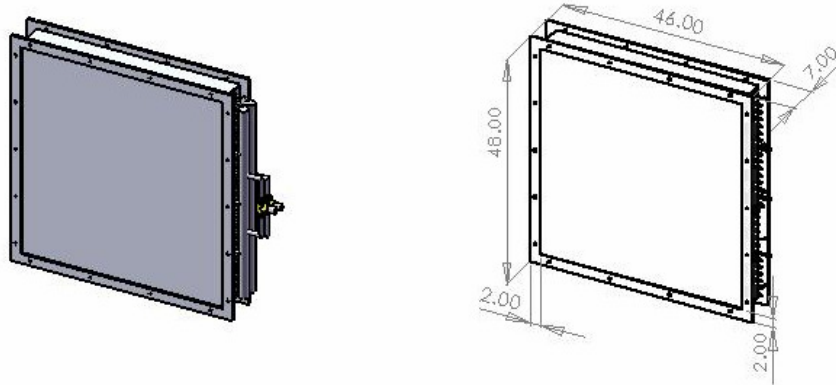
Overall dimension of the refrigeration coil installed in the wind tunnel of the air flow lab (unit: inch)
